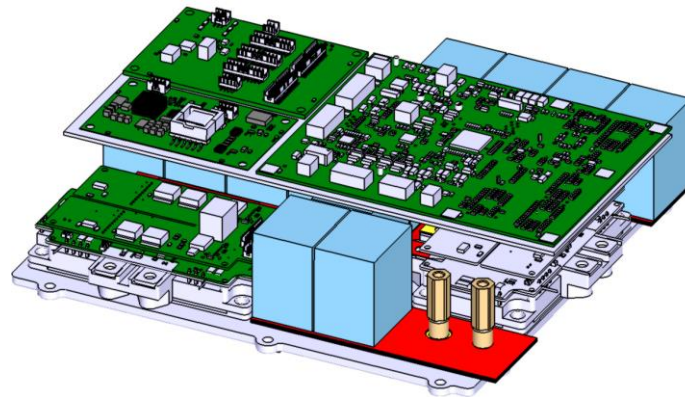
Mechanical integration of the inverter's boards on the machine casing.
